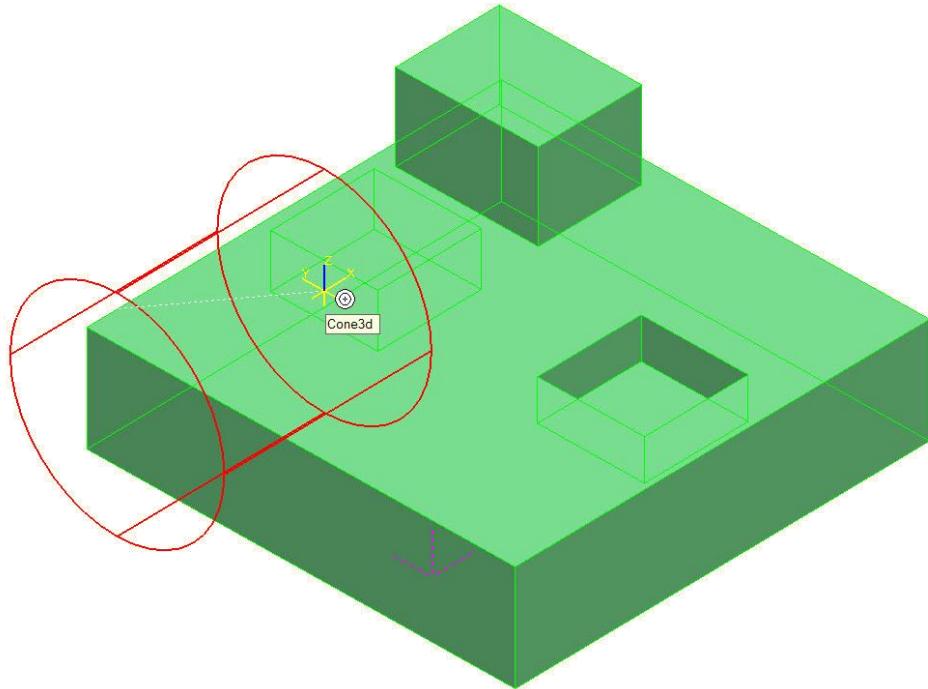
Designed Solid using a Suppressed Shape to Place another Shape
